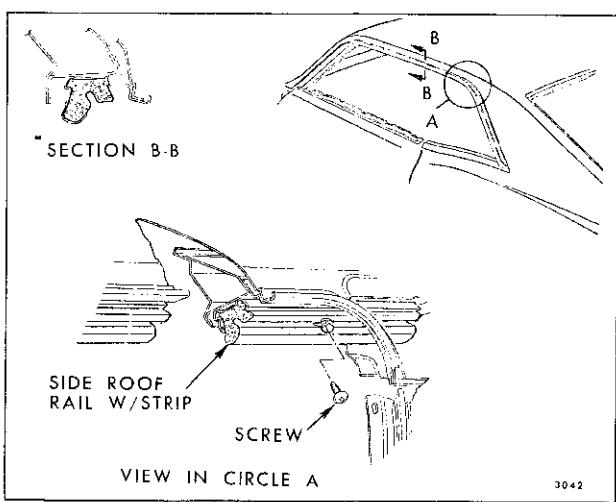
Side Roof Rail Weatherstrip - "E-47" Styles
